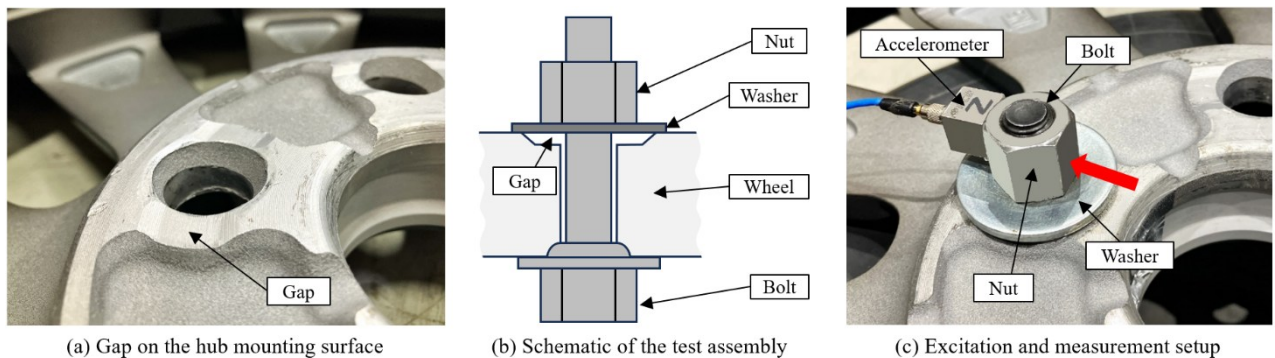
Wheel-side hub mounting surface with a gap and test setup
